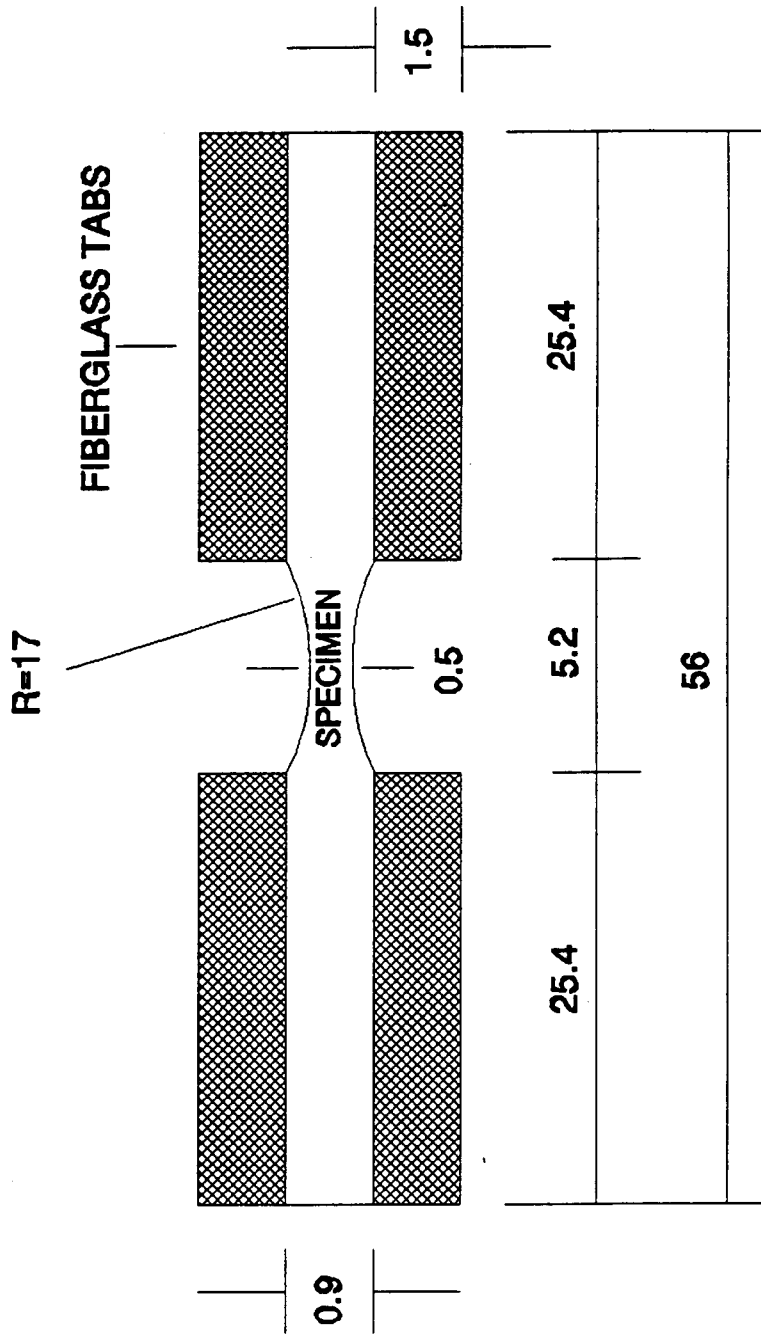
Geometry of Longitudinal Reversed Loading Specimen.
